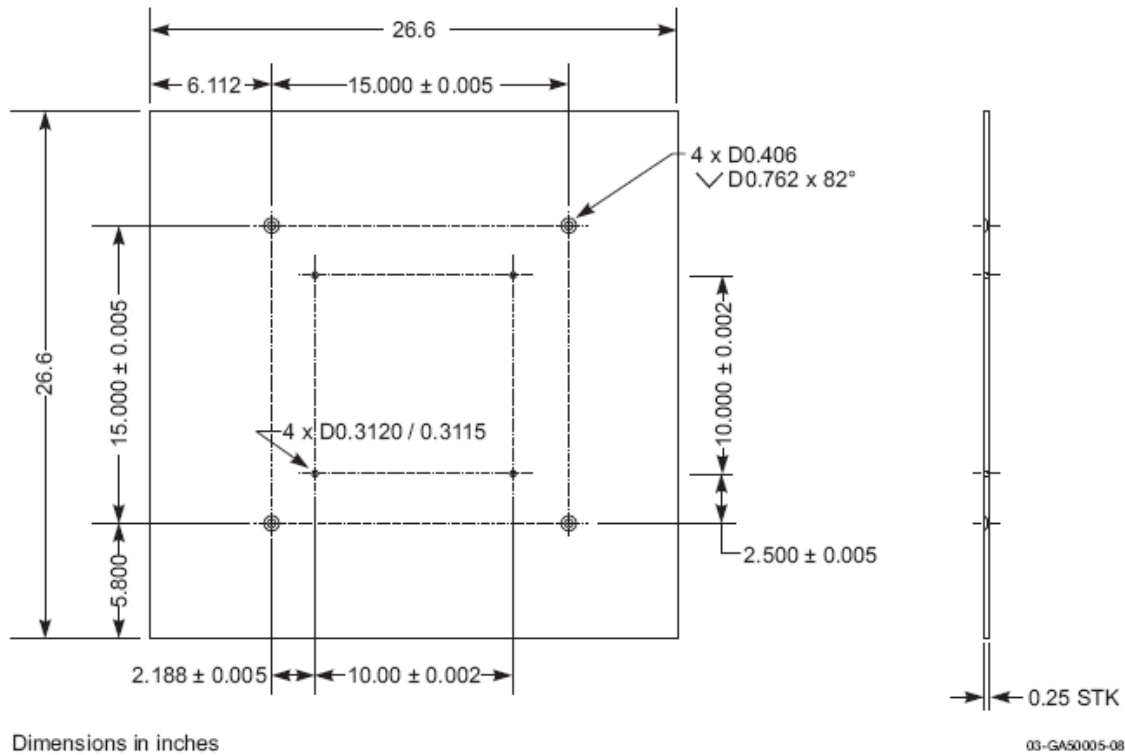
Schematic of the Aluminum Mounting Plate that Supports the Lower Stack.
